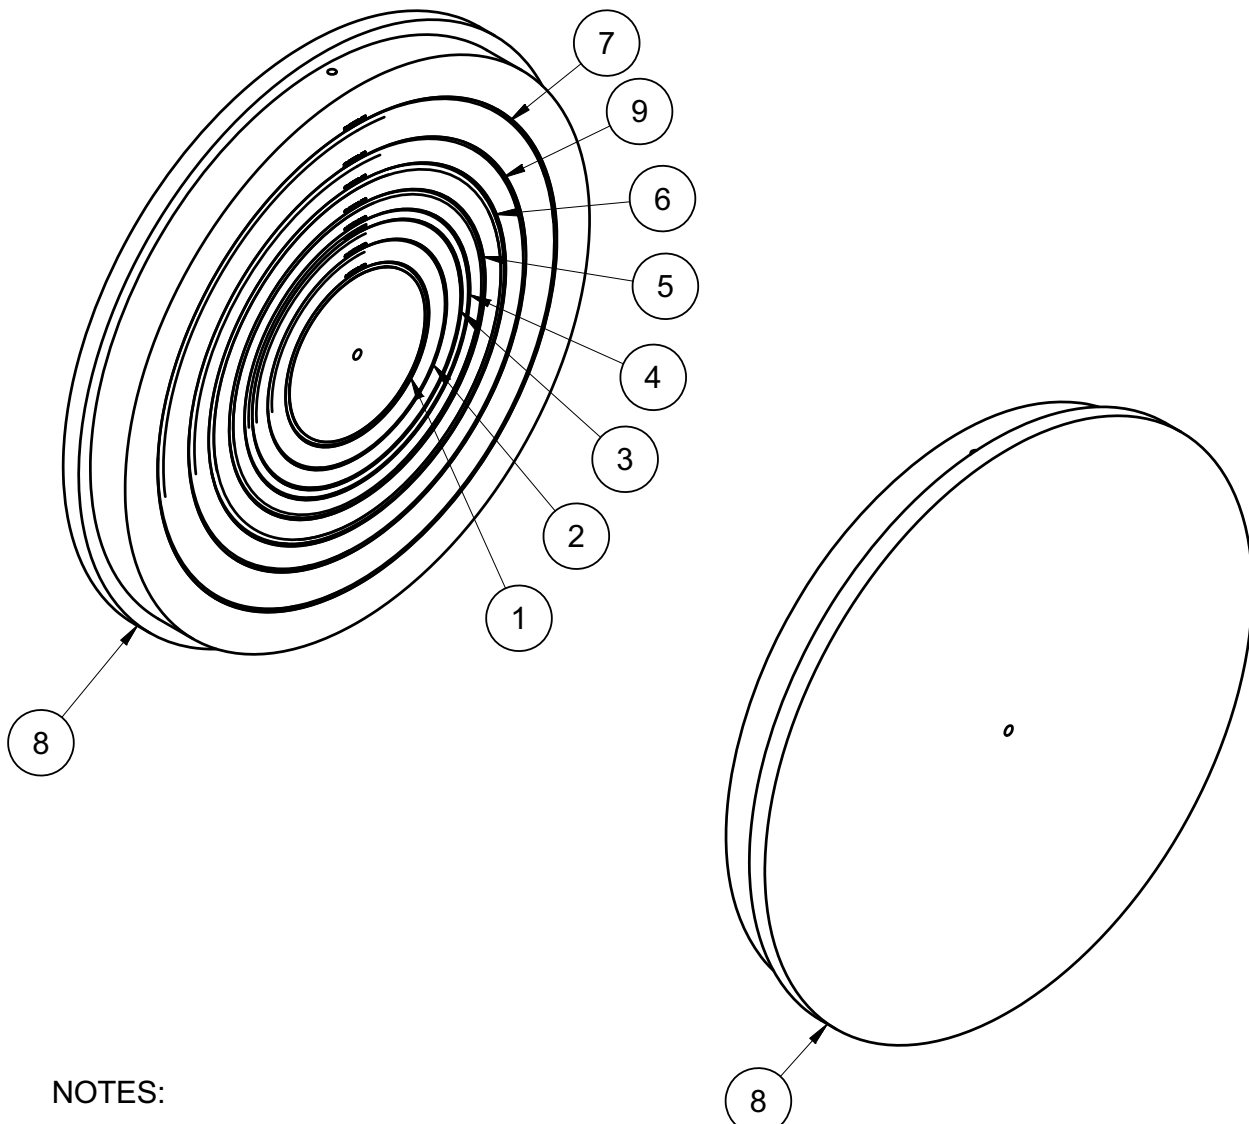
EASY OUT HOLDER ASSEMBLY (P/N 89975)
